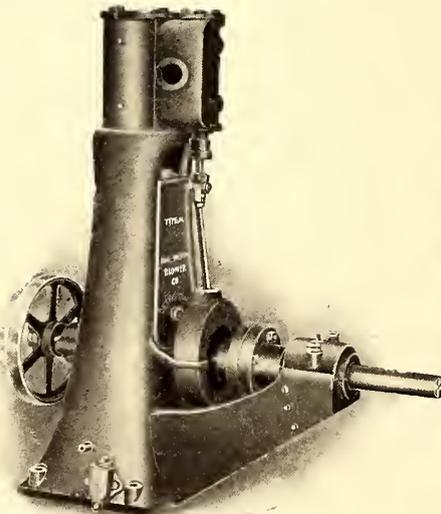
ILLUSTRATING THE CASTING OF THE JOURNAL BOXES IN THE ENGINE FRAME
